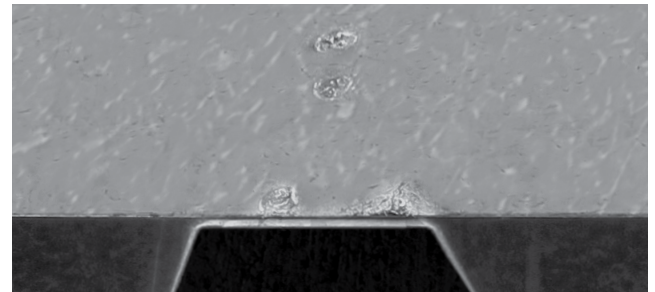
WELDED ATTACHMENT
